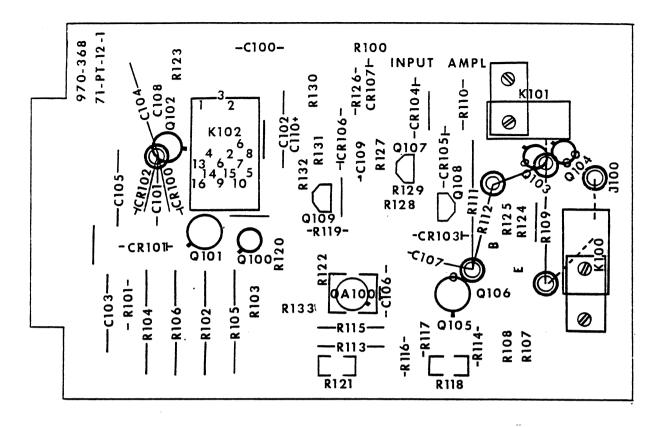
J5 Input Amp. Printed-circuit Board, code 900-375.
